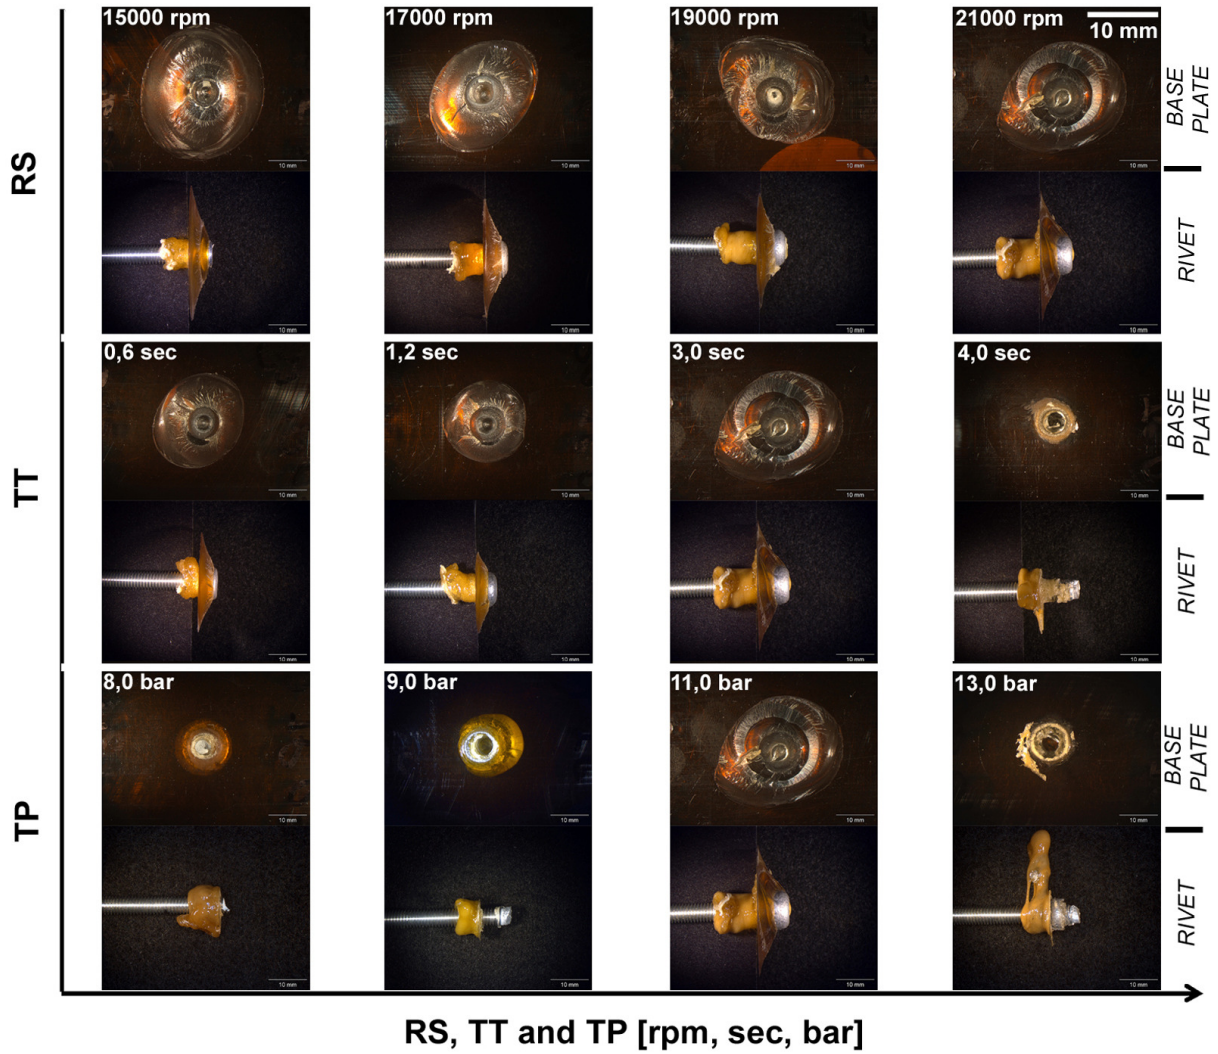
Appearance of fractured T-pull tensile samples of comparative point-on-plate friction riveted joints. For each sample photographs from fractured polymeric base plate (top photo) and from its rivet are presented, 6X.
